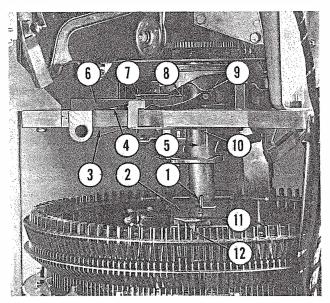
CANCEL LEVER ADJUSTMENT, 2400
